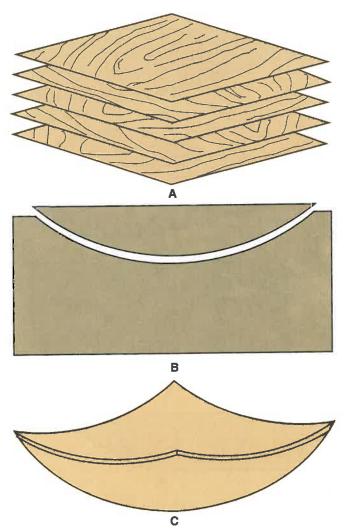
Molded plywood. A—Successive layers of veneer should alternate grain pattern 90°. B—The two mold halves should match perfectly. C—The molded plywood will retain its shape without springback.
